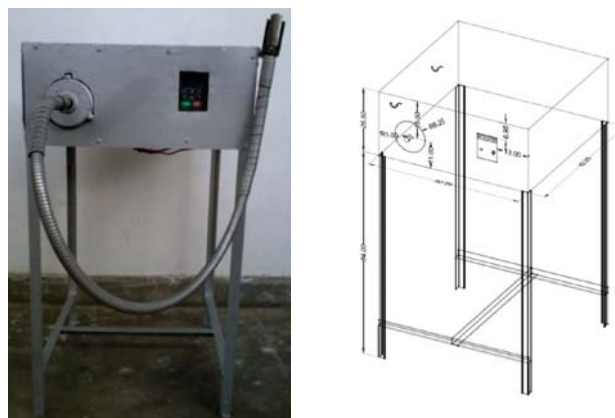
Fish descaling machine prototype and drawing in perspective view
